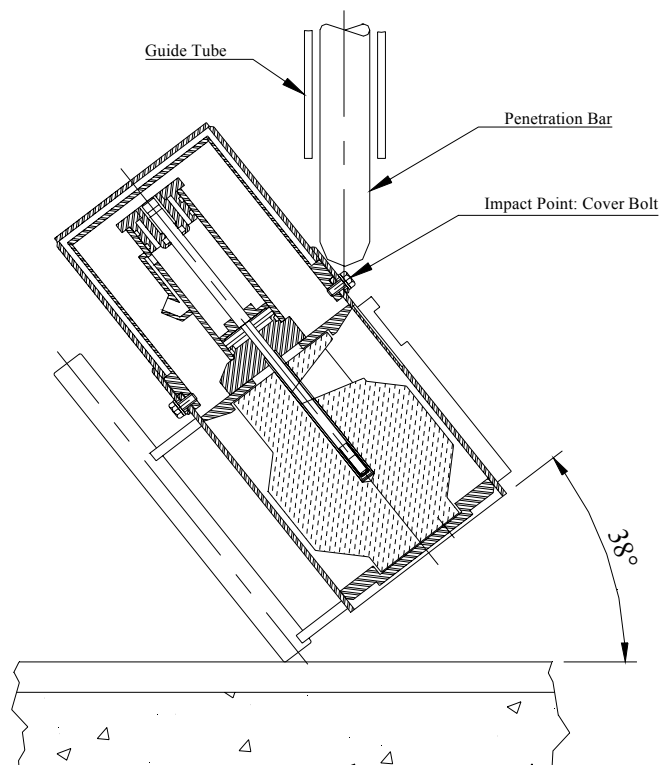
Specimen TP84(A) Orientation for the Penetration Test
